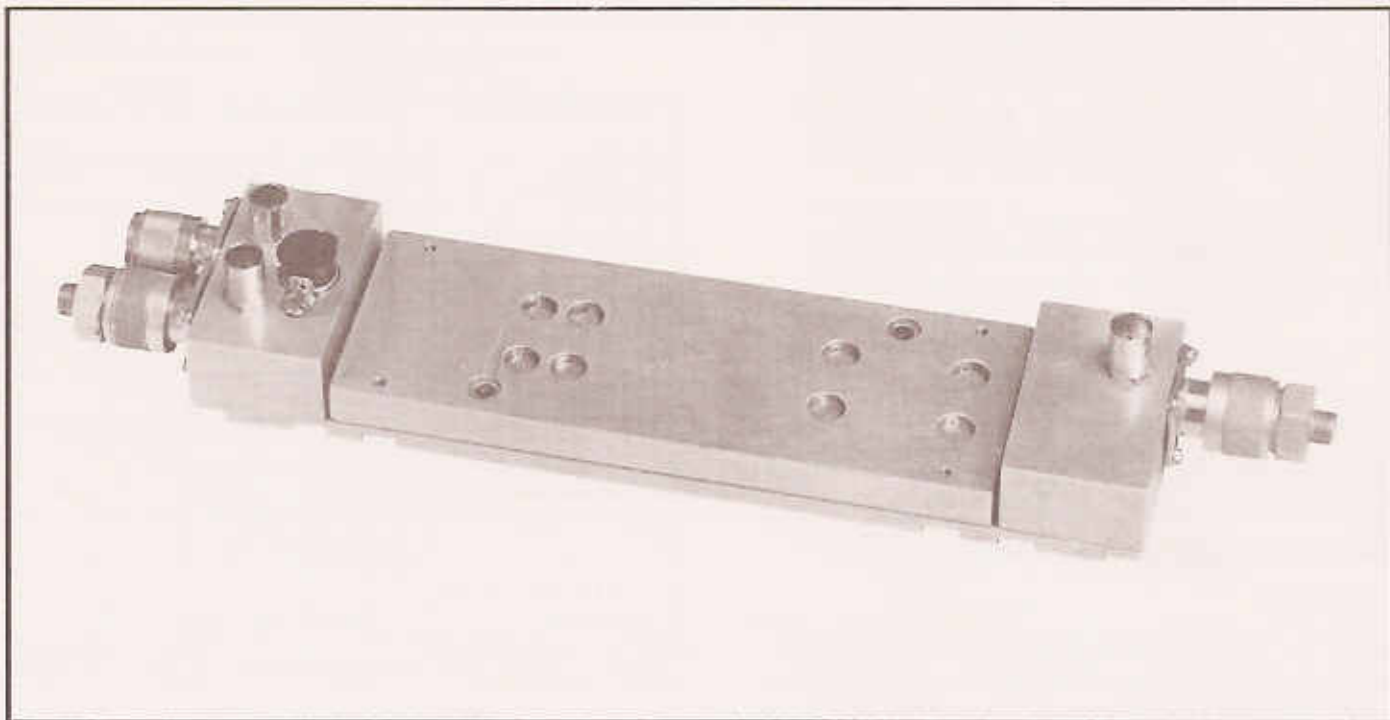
MODULE TEST FIXTURE XR2AMTF-1
